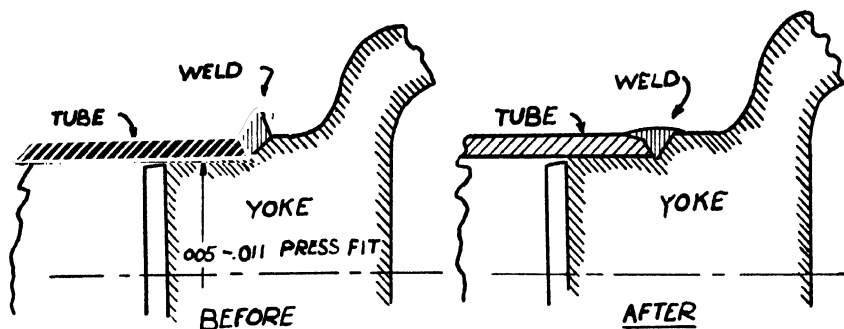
, (left), "Before," and Fig. 2, (right), "after" views of welds.
